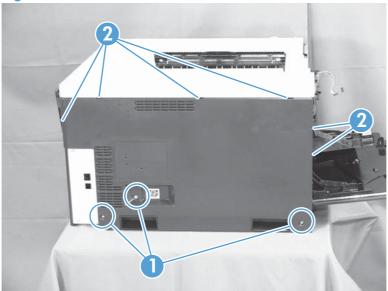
Remove the right-front cover and control-panel assembly (3 of 3)
